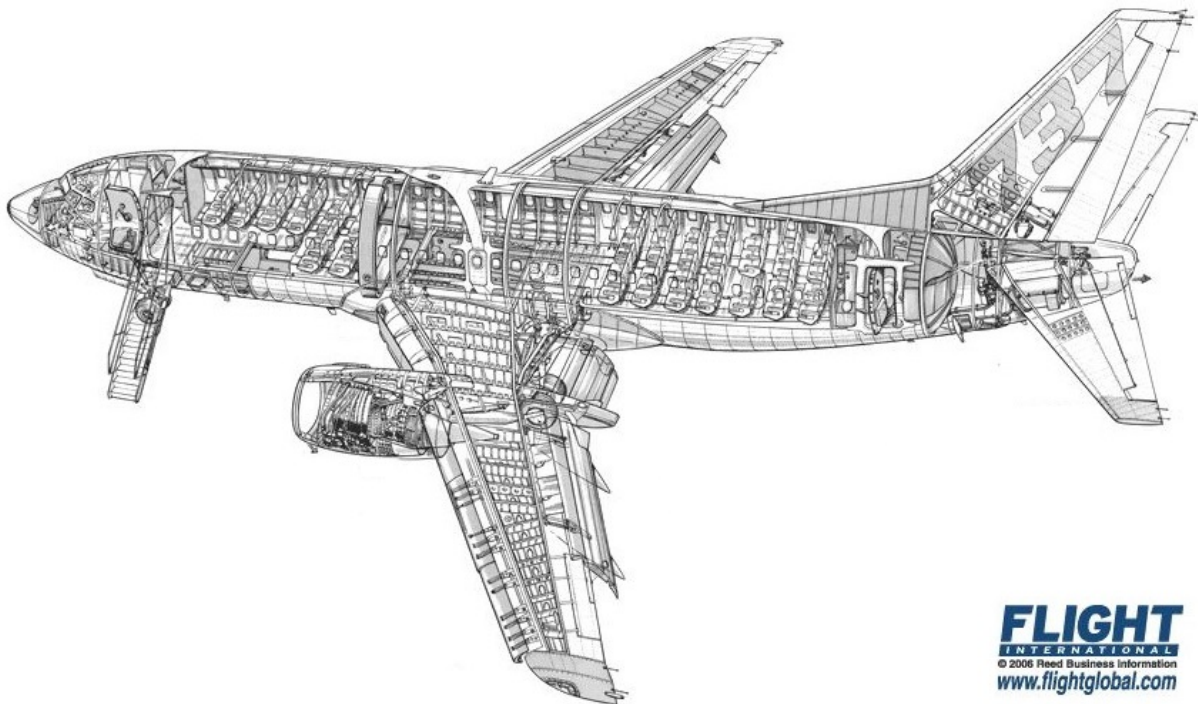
Open view of the B737-500 showing the configuration and layout of the original model
